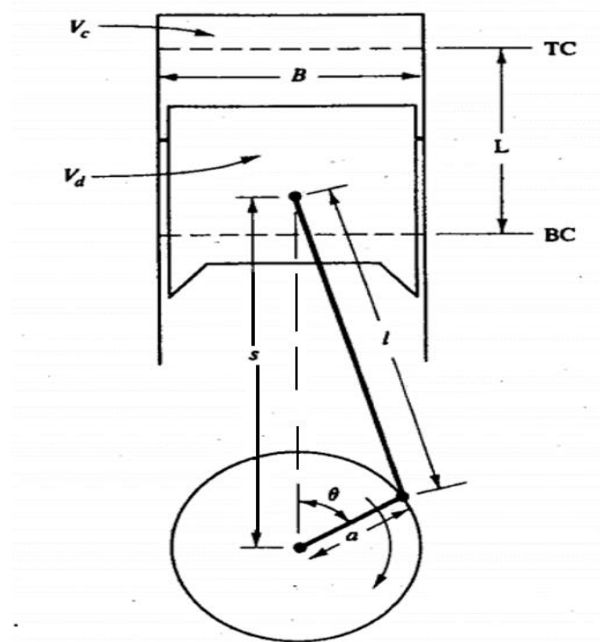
Piston and cylinder geometry of a reciprocating engine.  $B$  = bore;  $L$  = stroke;  $l$  = connecting rod length;  $a$  = crank offset;  $s$  = piston position;  $\theta$  = crank angle. Adapted from [31].
